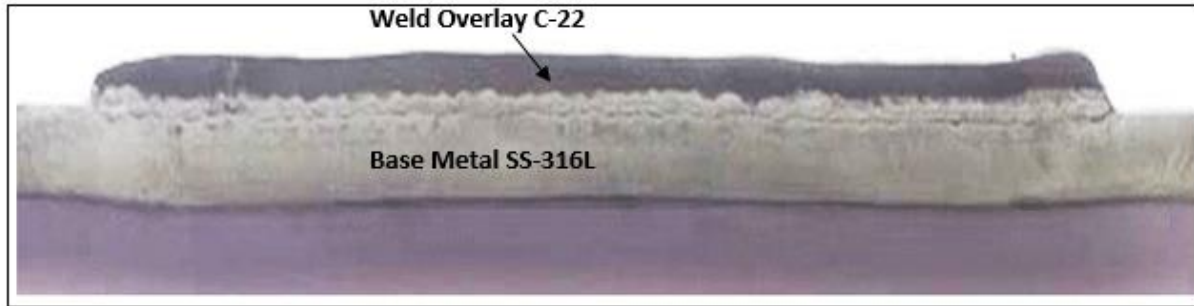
Hastelloy Weld cladding Cross Section Visual Test
